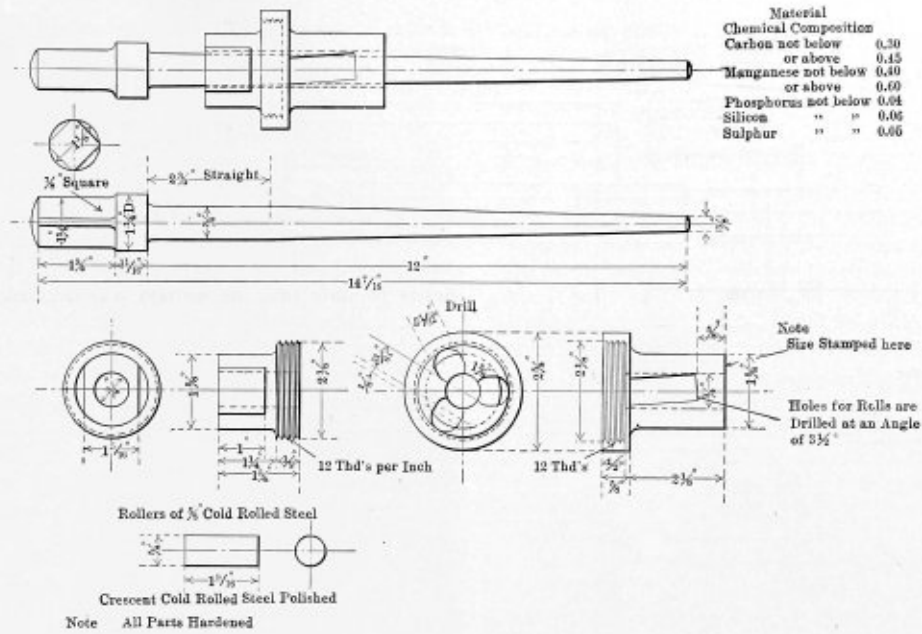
1 3/8-INCH FLUE EXPANDER.
